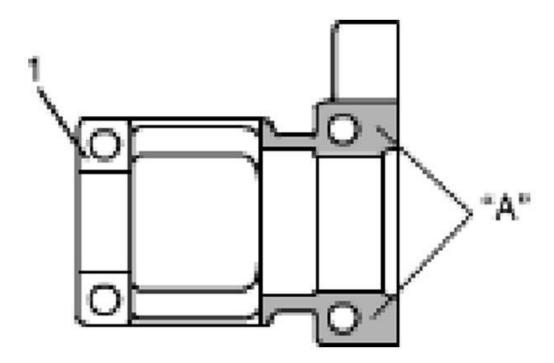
Identifying Area Of Sealant On Exhaust Camshaft End Housing Courtesy of SUZUKI OF AMERICA CORP.
